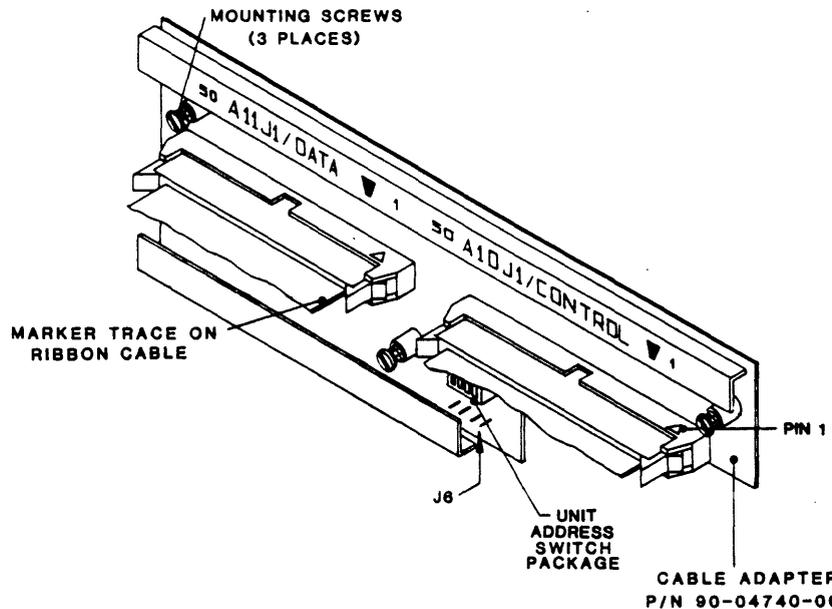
Cable Adapter Assembly (Kit) P/N 90-04970-NKK
